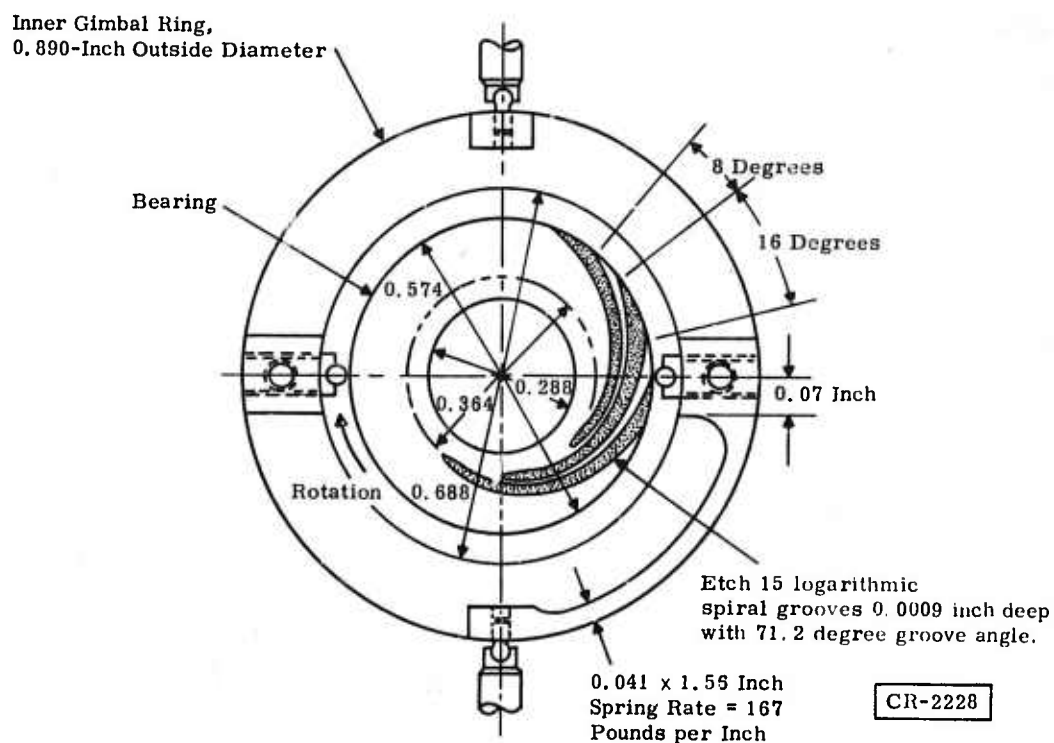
Gimbal-Mounted Spiral Groove Thrust Bearing
